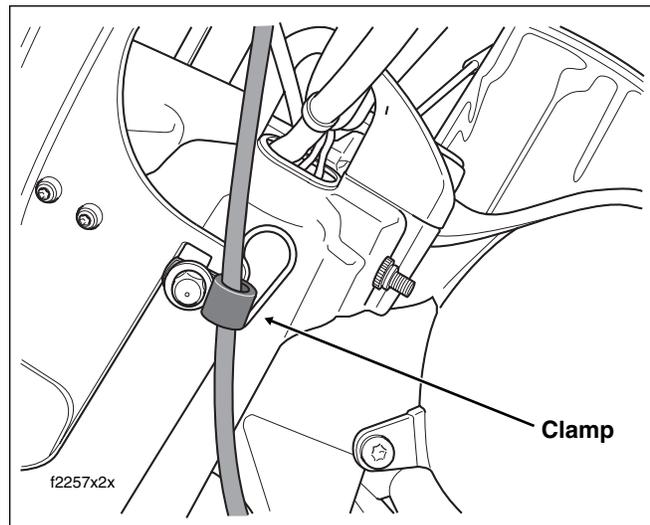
Clutch Cable Routing - FLHR/C (Left Side View)
